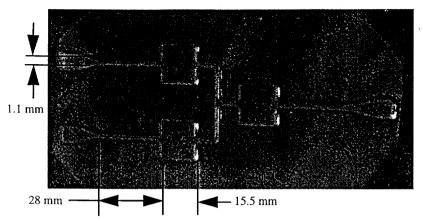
Two sheets of 50 μm thick polypropylene embossed and laser welded into a monolithic fluidic structure.
